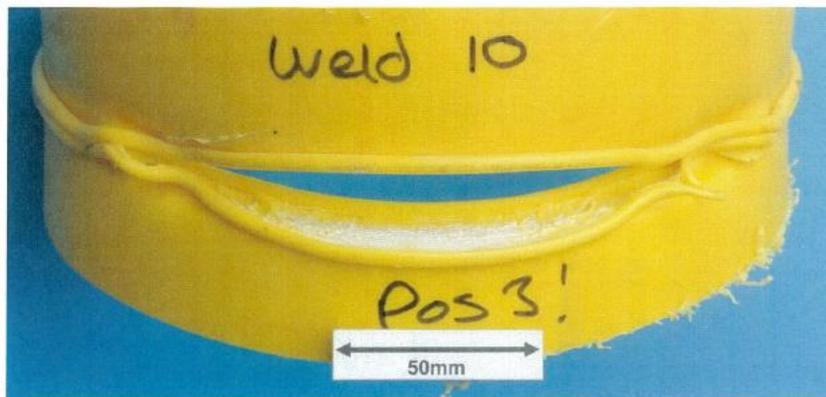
Failed specimen and fracture surface for Run 10
